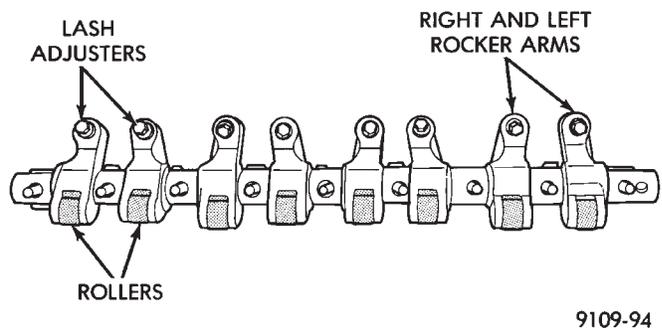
Rocker Arm and Lash Adjuster Assembly-Right and Left
